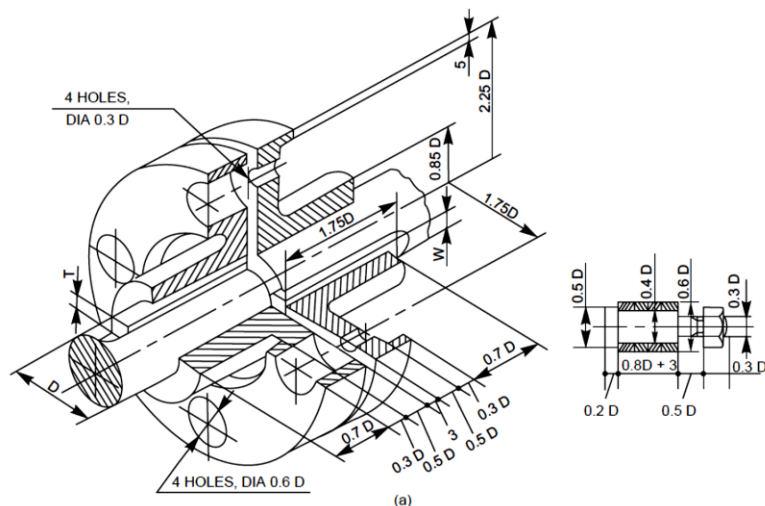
Bushed pin type flanged coupling (Contd.)
